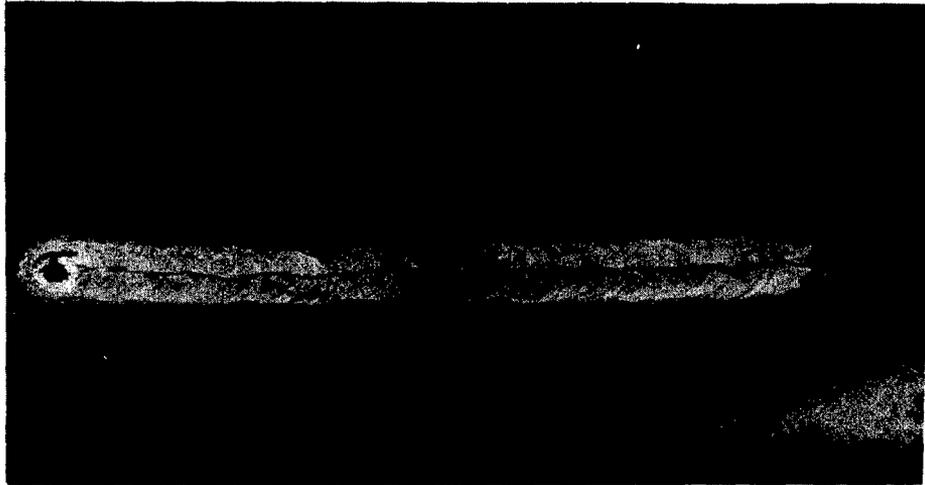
WELD BEADS MADE ON SINTERED NON DEOXIDIZED MO. IN HE. ATMOSPHERE
